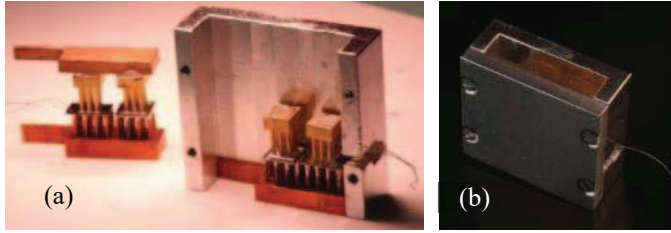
Assembly process for Step 4 indicating how the diode-switch structures fit into the stacked assembly box.
